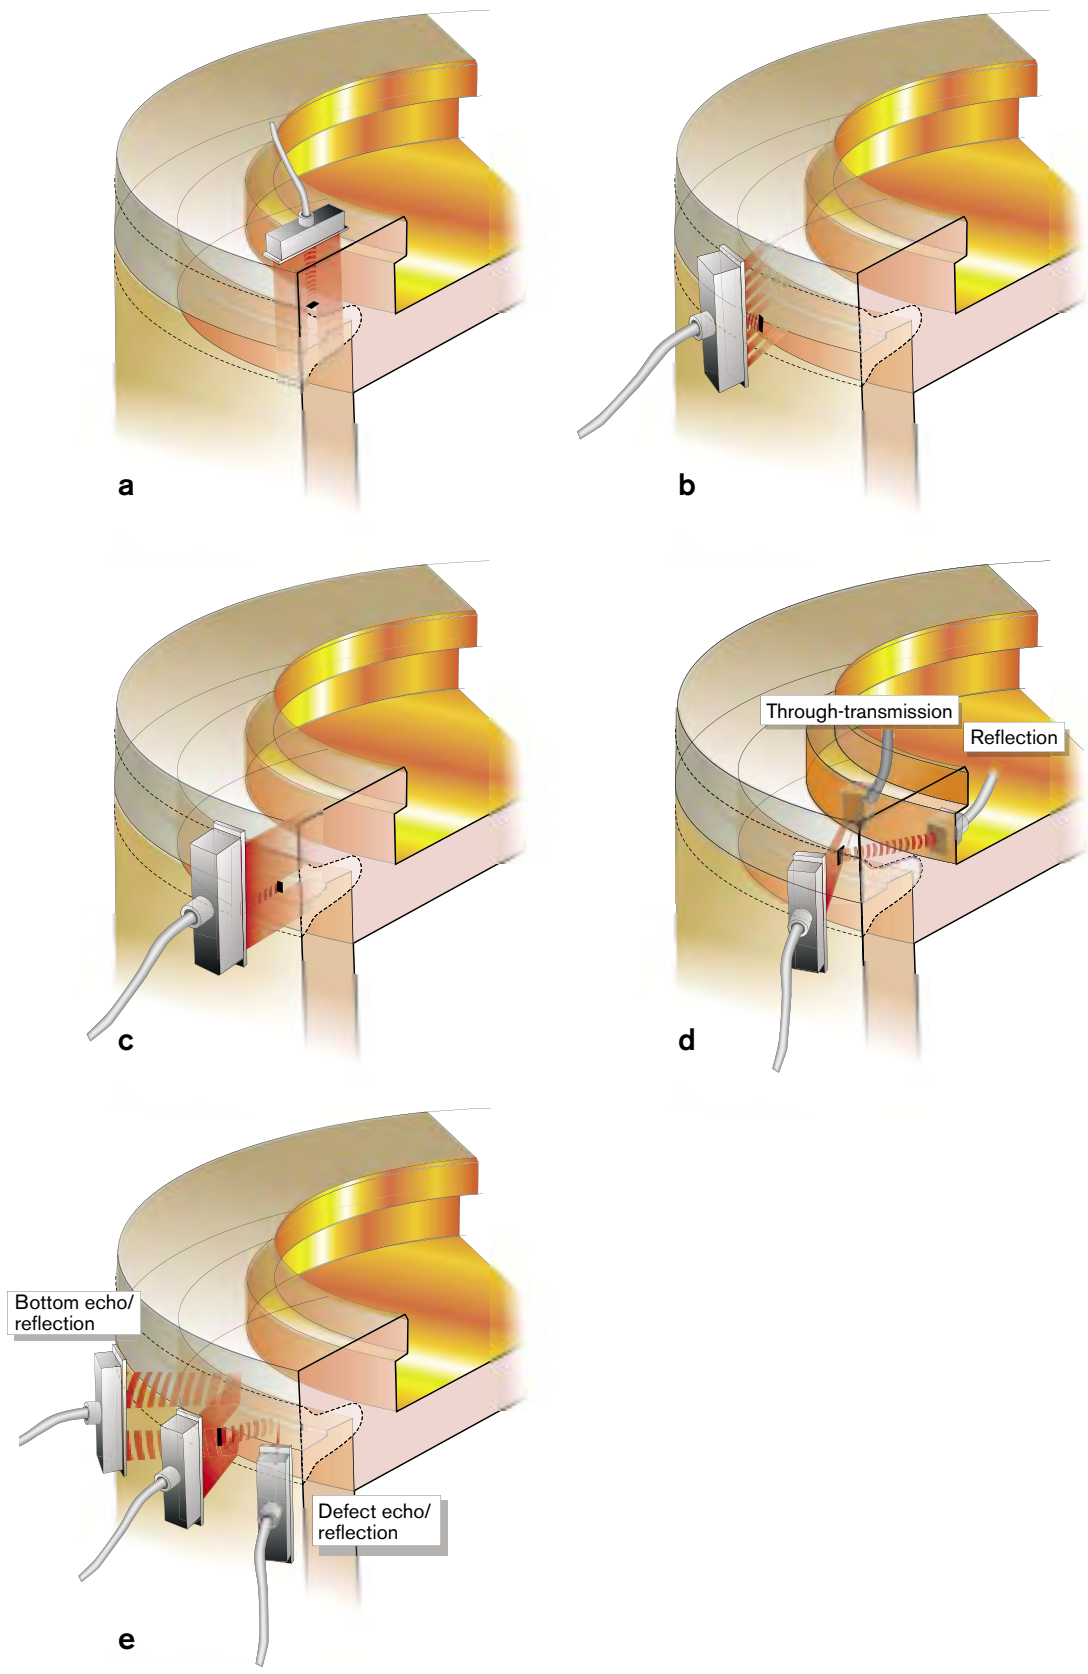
Methods for ultrasonic testing of FSW sealing weld.
